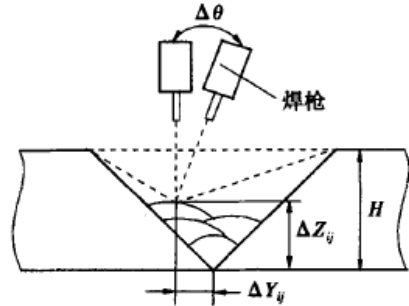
Multiple-pass fill layout of V-groove, Zhang et al. (2009)
